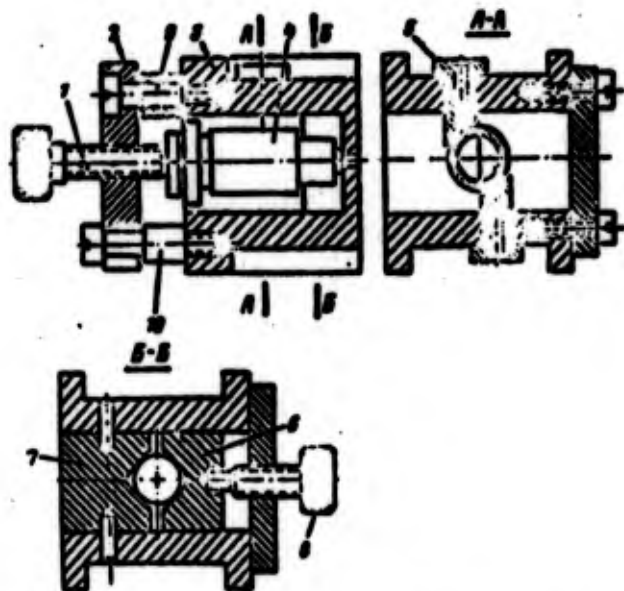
Jig for the drilling of tangential holes in an injector:
